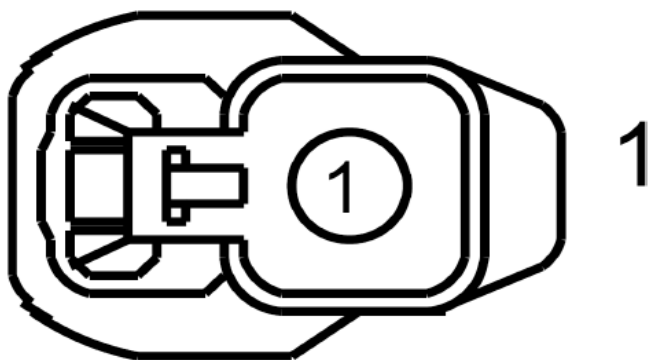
Front Blower Motor Resistor Assembly Connector End View (C293)
